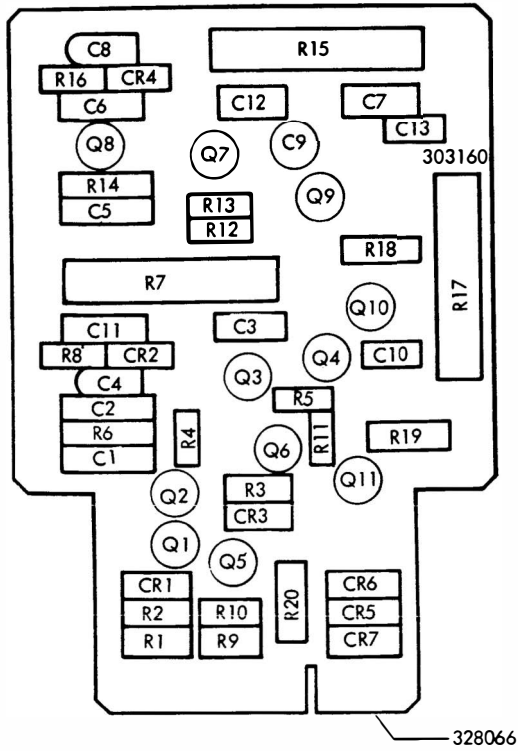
321991 CIRCUIT MAGNET DRIVER ASSEMBLY
